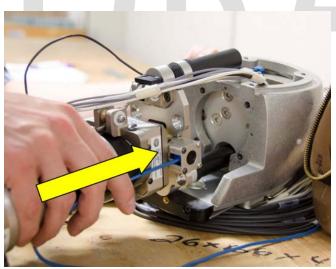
Alignment and installation of neck assembly to skull assembly
